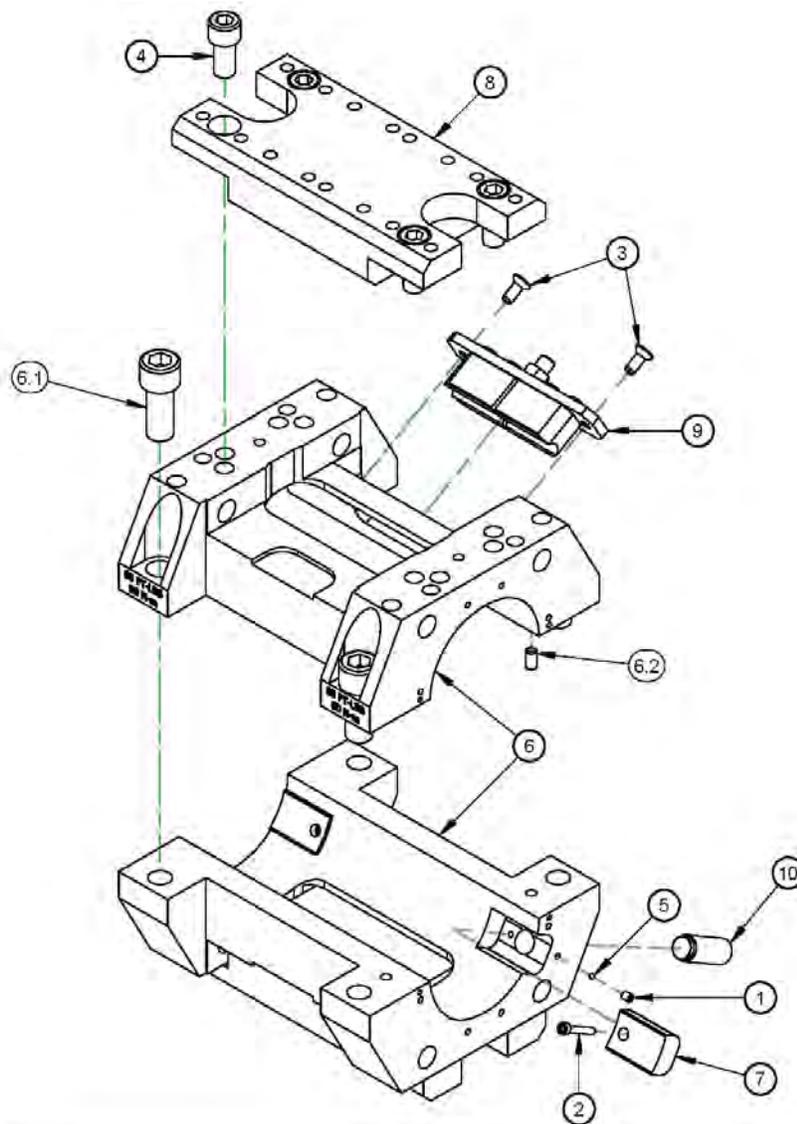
BORING/FACING TOOL ARM CHART ASSEMBLY (P/N 86638)
